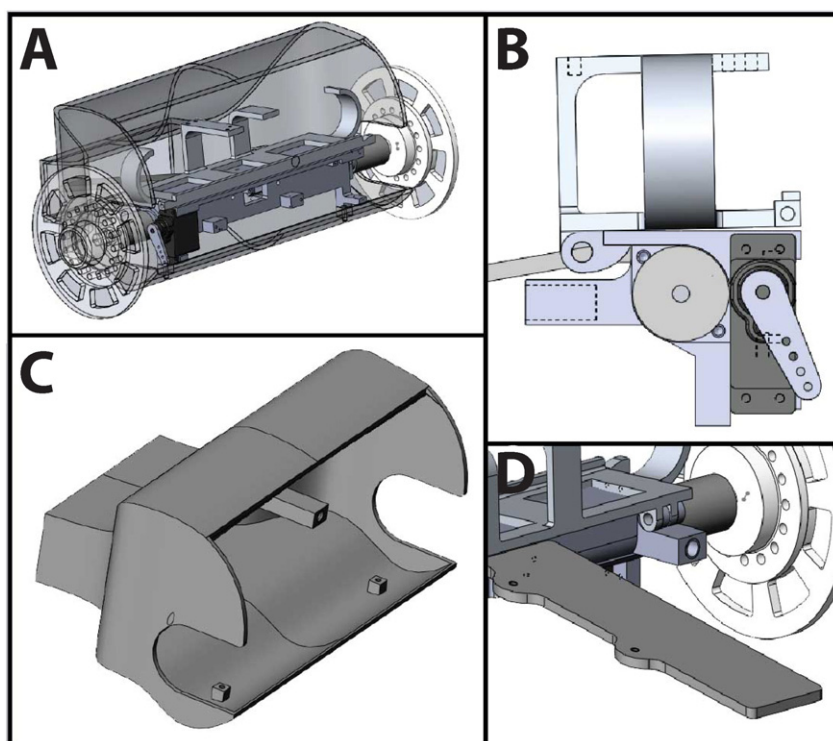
Computer-aided drawing of VolcanoBot2 components. A. Fully assembled with the shell shown as a transparent layer. Improved version consists of 4 parts to carry the instrument and electronic payload: the body platform, wheel adapter, tail, and protective shell. B. Body platform consists of a hinged piece where the top half (light blue) is the Carmine 1.09 harness and the bottom half (medium blue) is the Maxon motor and light harness, with a servo (dark gray and blue) to control the Carmine 1.09 mount. C. Protective shell, attachment points protruding into the robot from the back of the shell secure the shell to the body platform. D. Tail and wheel adapter. The tail (dark gray) has 2 mounting holes for the RPi. Two wheel adapters (white) are used on the robot: they allow the motors to securely attach to the cast wheels, providing maximum transfer of power for mobility.
